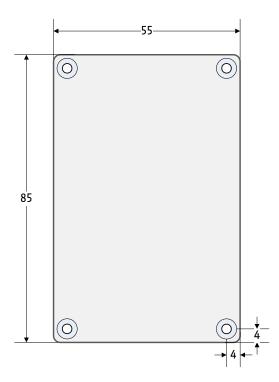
Dimensions: TMC5062-EVAL and STARTRAMPE
